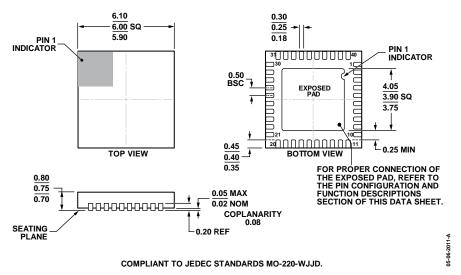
40-Lead Lead Frame Chip Scale Package [LFCSP\_WQ] 6 mm × 6 mm Body, Very Very Thin Quad (CP-40-14) Dimensions shown in millimeters
